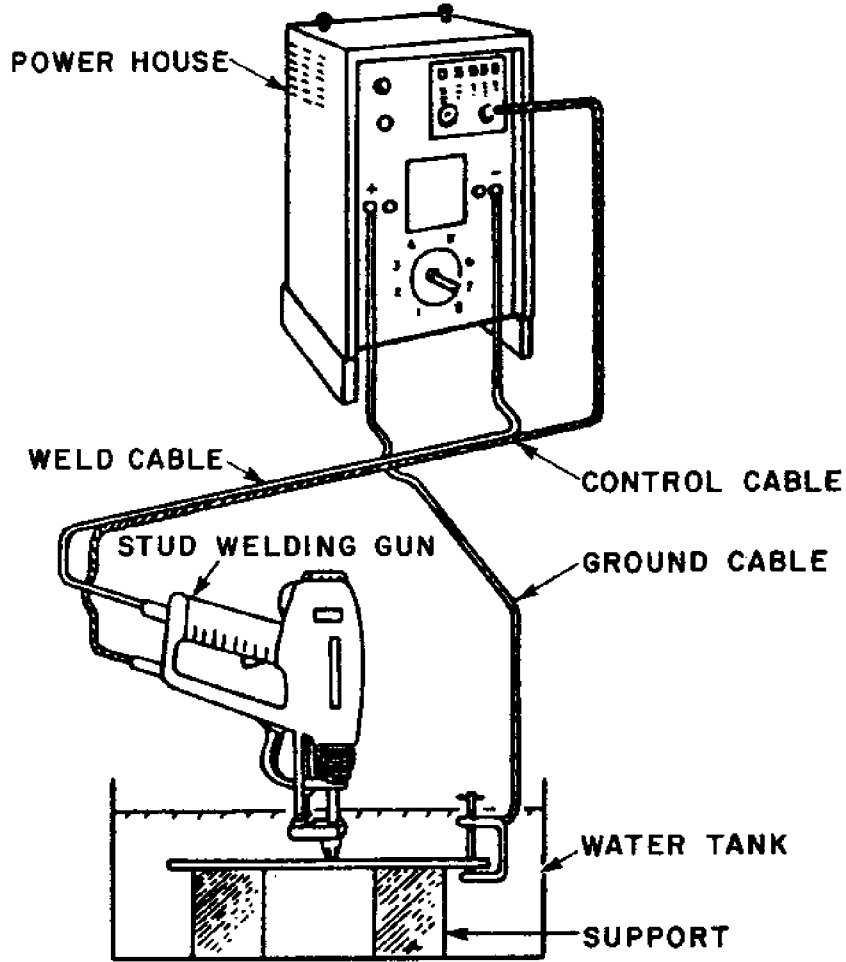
Arc stud welding setup used by Chiba
